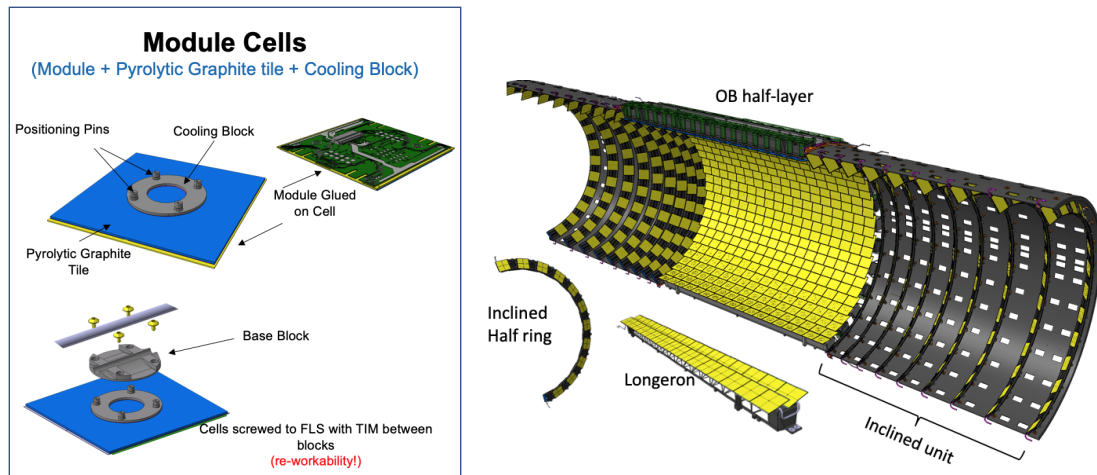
Left: Outer Barrel module cell exploded view. Right: Outer Barrel local supports (Inclined Half-Ring and Longerons) designs and a fully-assembled half layer made out of two Inclined Sections and Longerons.
